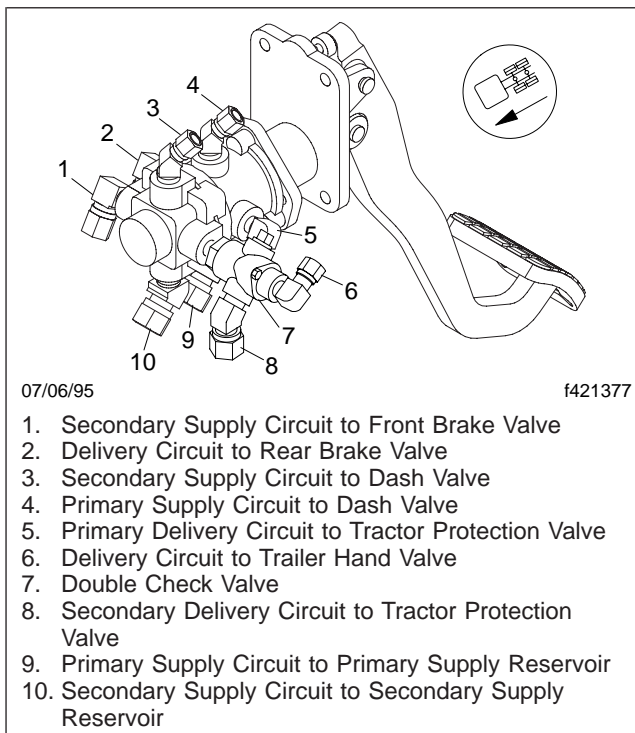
, Brake Valve and Double Check Valve Plumbing Circuits
